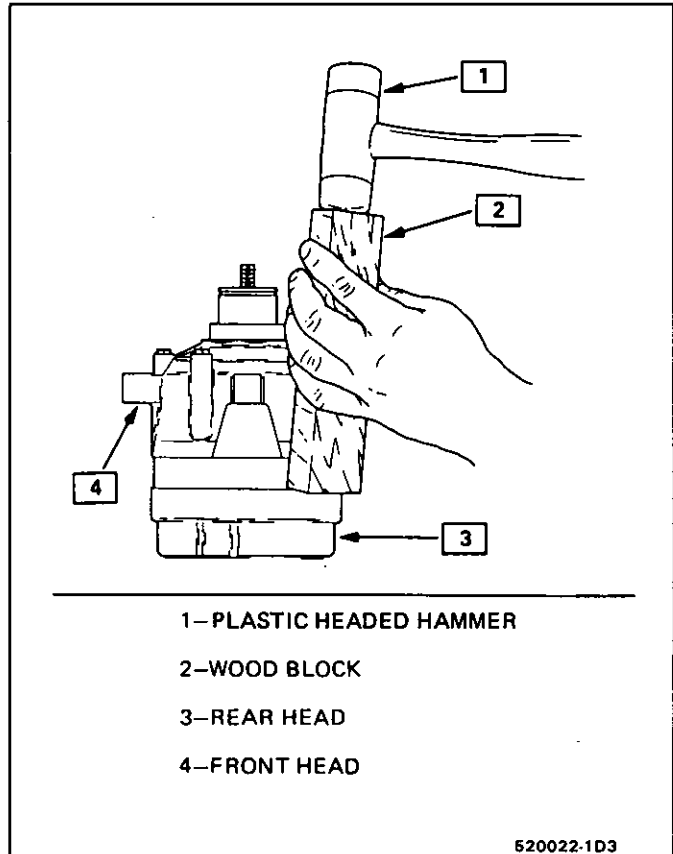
Tapping Front or Rear Head Free of Cylinder
